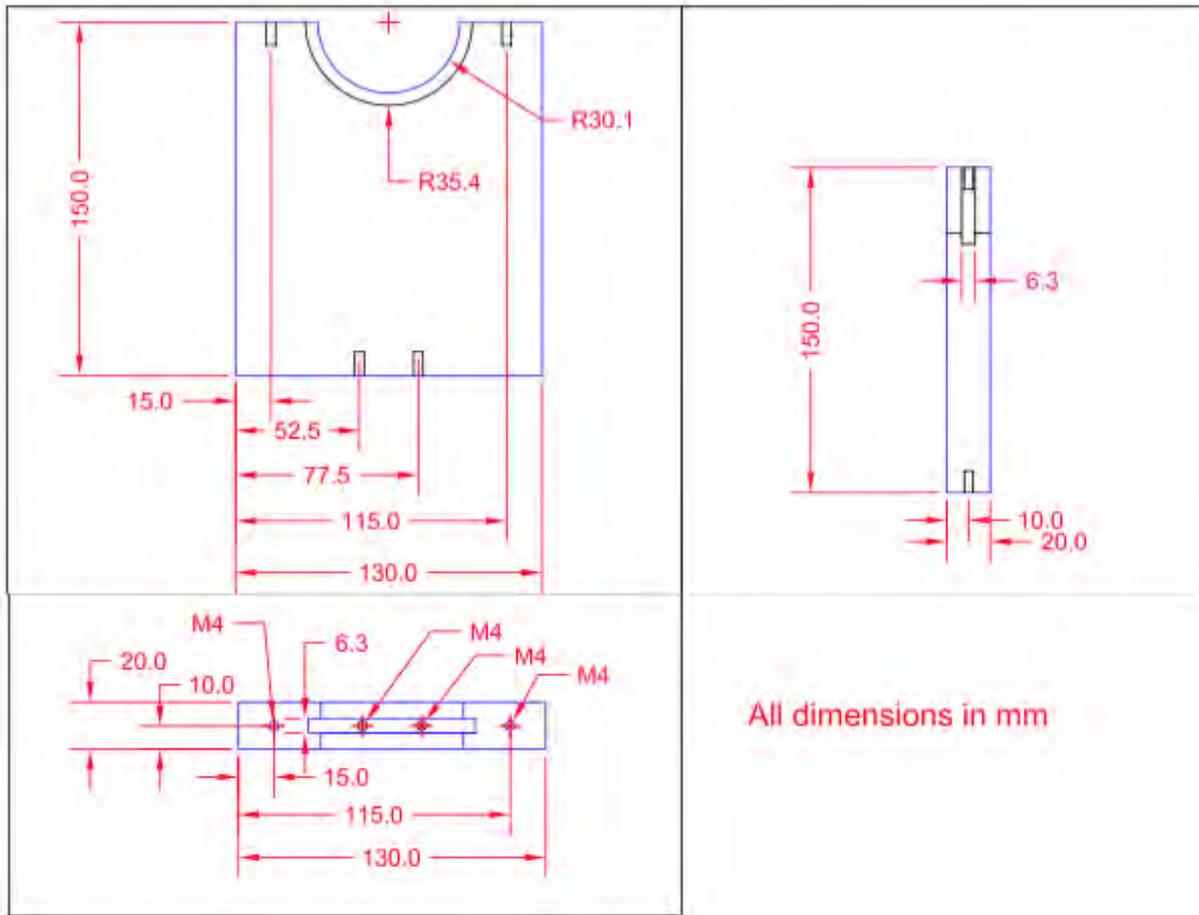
Construction apparatus: Technical drawing of the vertical piece
